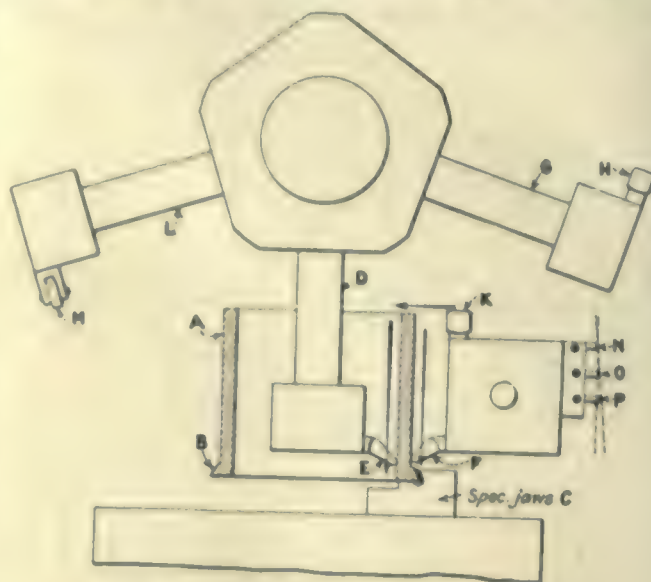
TOOL LAYOUT FOR PISTON-RING POT
